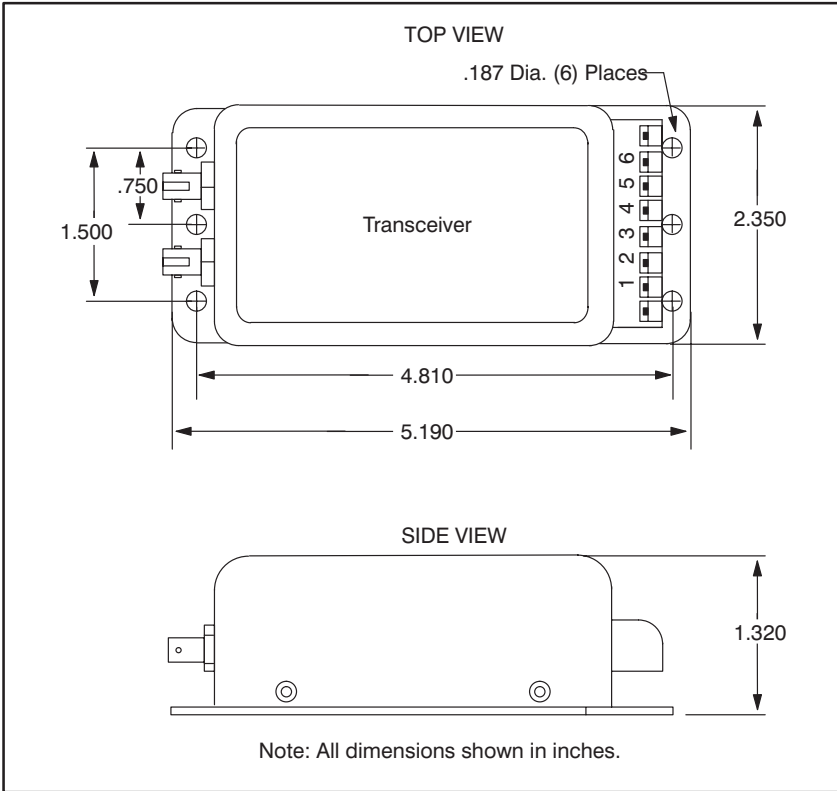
Stand-Alone Transceiver Mounting Dimensions
